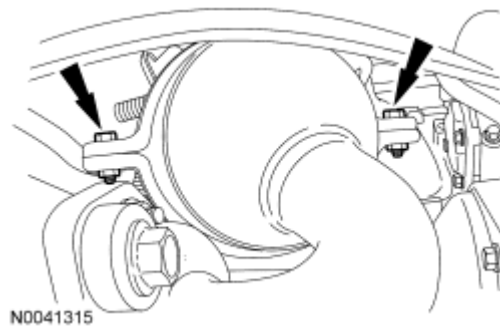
Locating Catalytic Converter Band Clamp And Bolts
